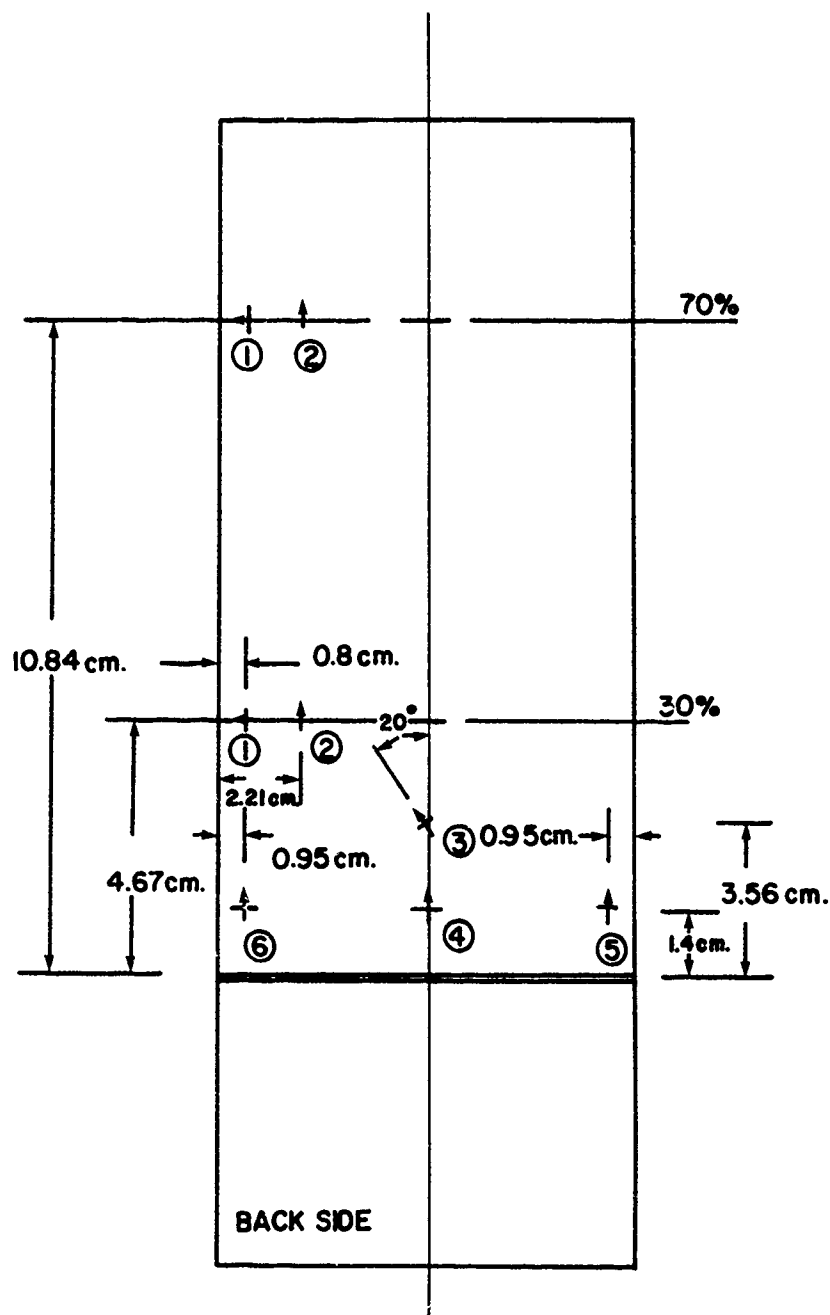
A. Strain Gage Locations for Group 5 Structural Element Test Specimens.
